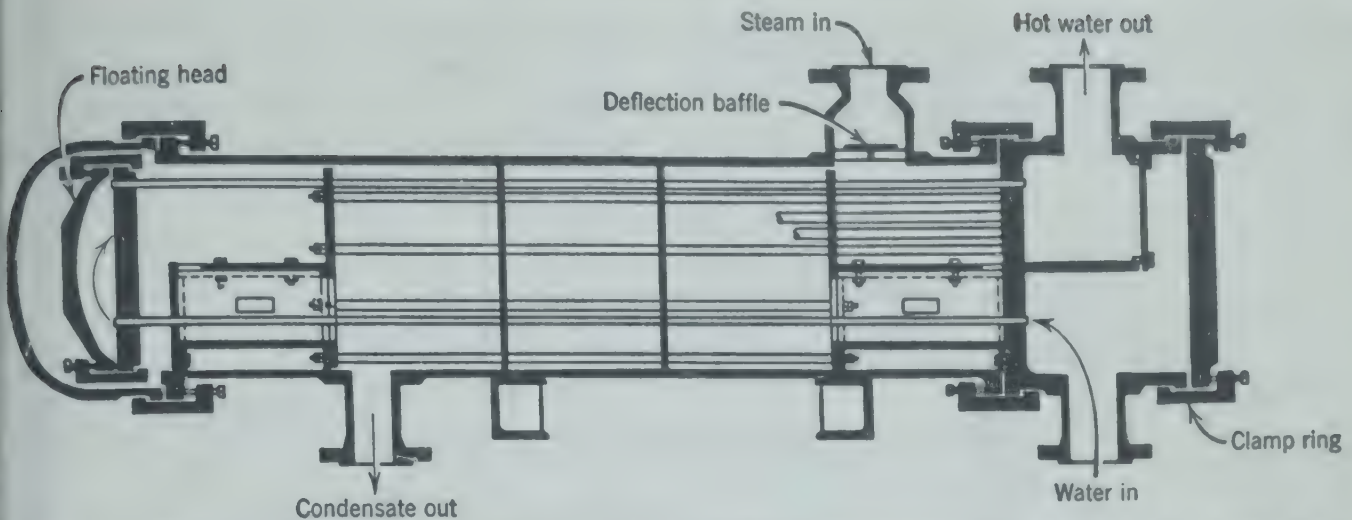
Cross-sectional drawing of a feed water heater for high-pressure service. (American Locomotive Co.)
